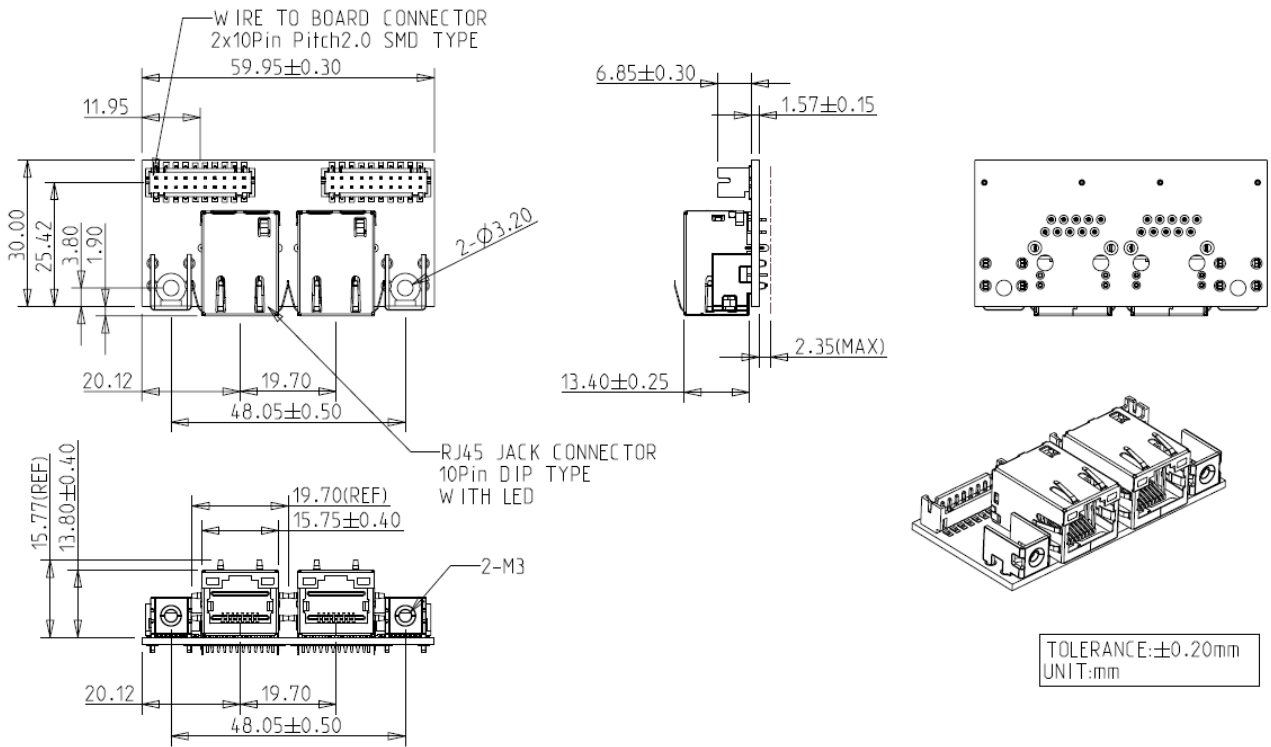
Mounting Hole Daughter Board Drawing (EGPL-G201-C1/W1)
